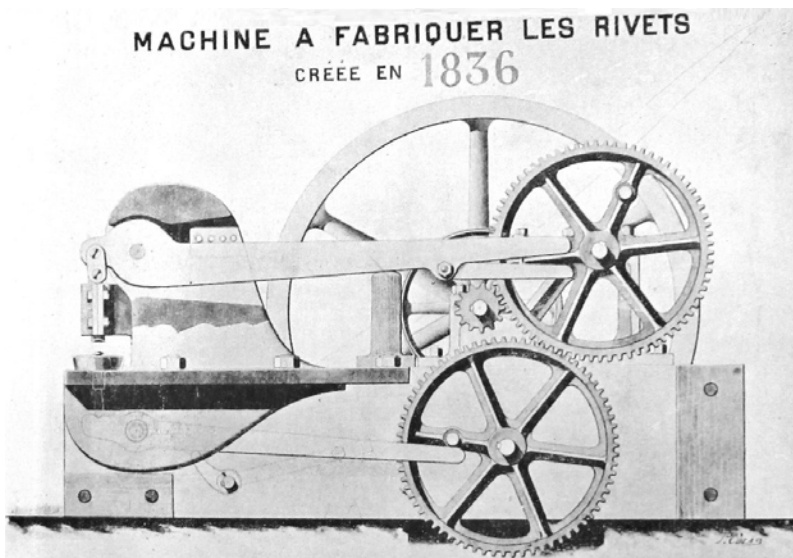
Antoine Durenne's rivet-making machine (Paris, 1836) (Frémont 1906, 4)
